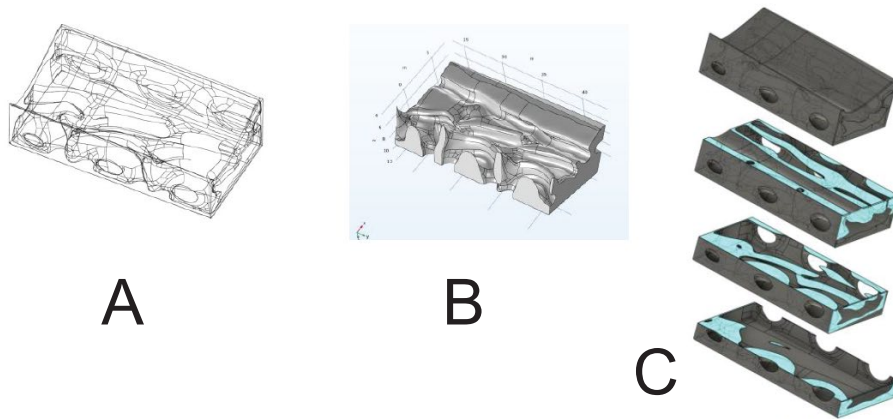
Topology optimization of a mold: A) Mold module with hidden lines B) Optimized air channel for heating and cooling C) section views of the mold module with air channels
